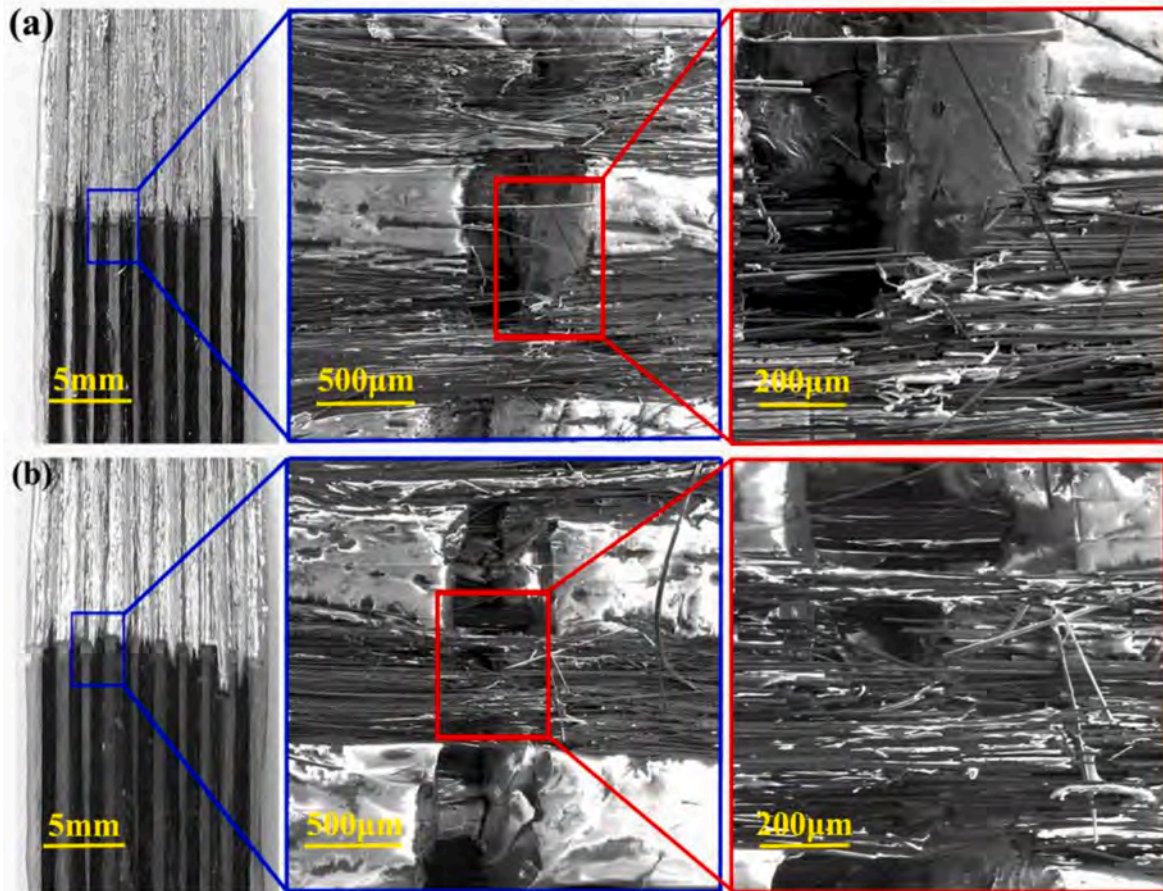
Micromorphology of fracture surface after three-point bending test of the printed specimens with printing speed of a) 1 mm/s and b) 6 mm/s.
